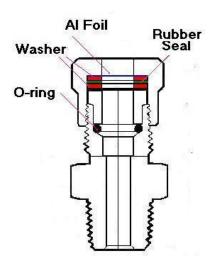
Diagram of the aluminium window assembly through which the x-ray beam passes into the flame chamber.
